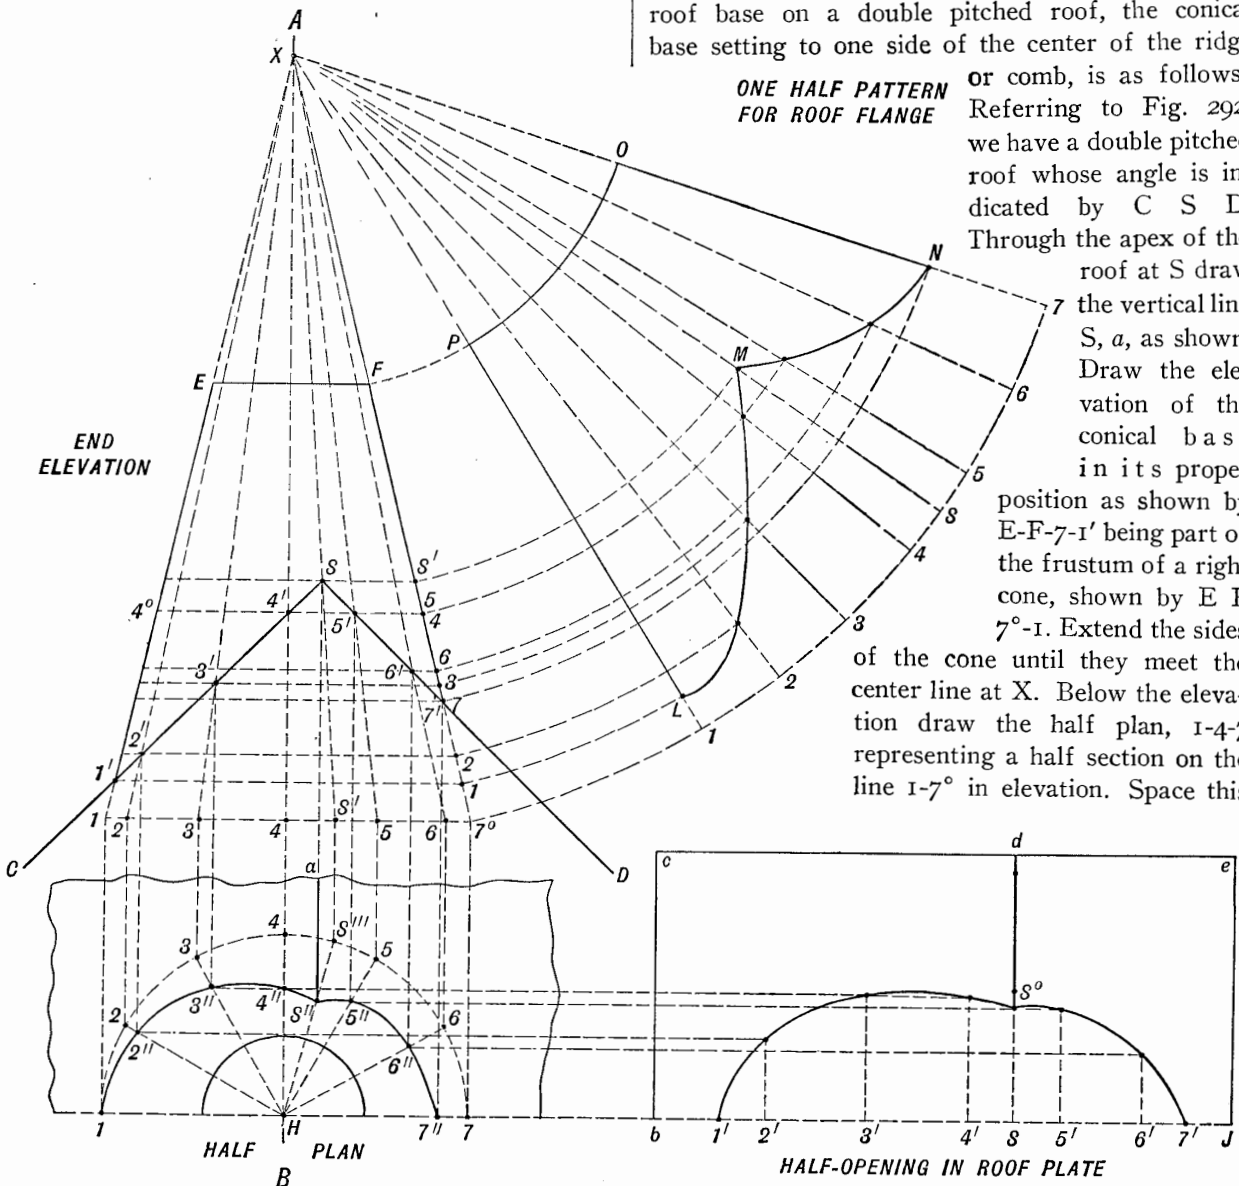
Patterns for Roof Plate and Base, Setting to One Side of Ridge on a Double Pitch Roof
